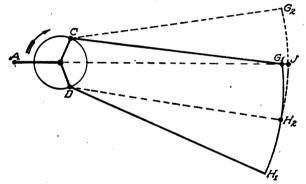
"Open Rod" Arrangement of Eccentric Rods in Stephenson Gear
